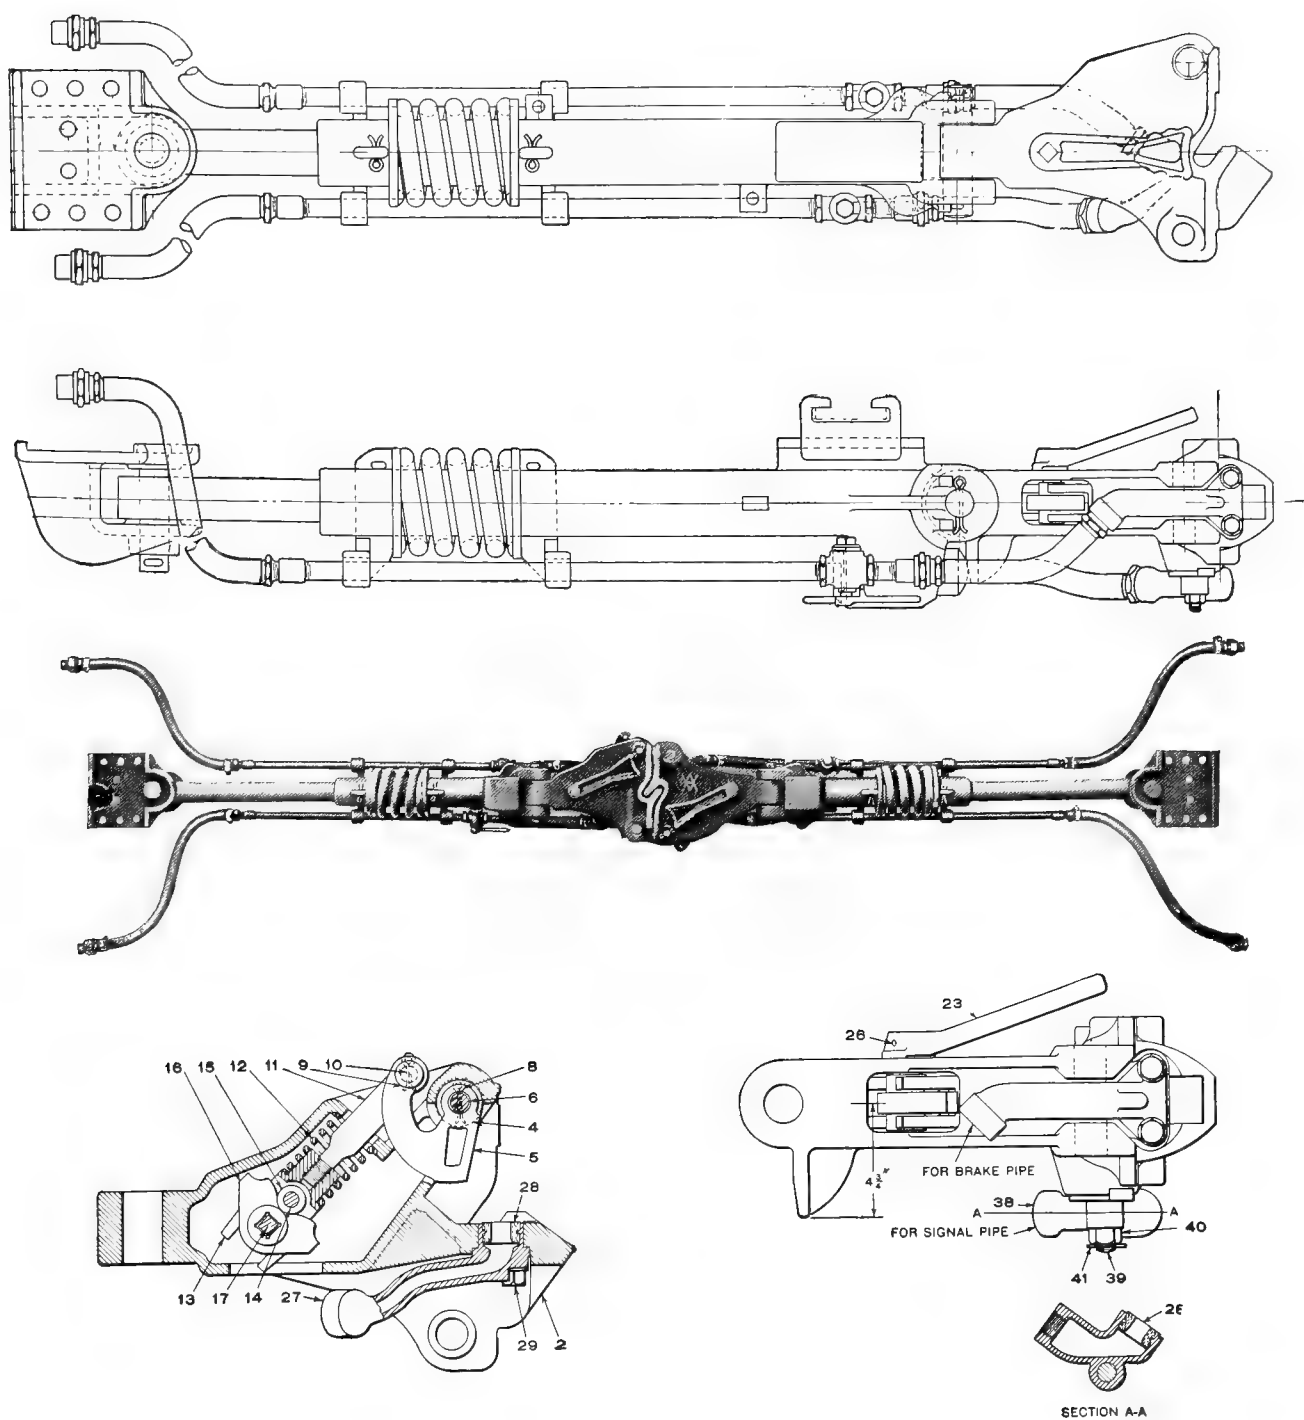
Westinghouse Automatic Car and Air Coupler, Type C-3-A, with Draft Gear, Anchor Castings, Etc
